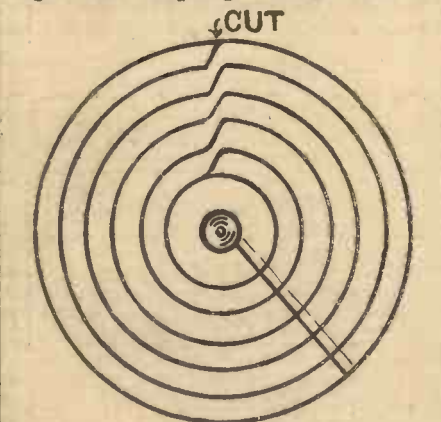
Setting out the arcs for a scroll-cut joint.
